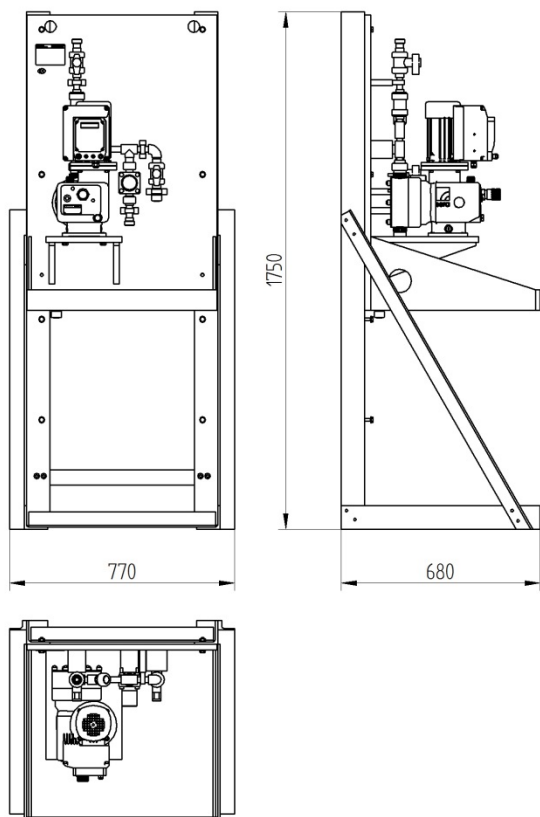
Dimensions of the CVD1s (floor mounting, GFK stand)
